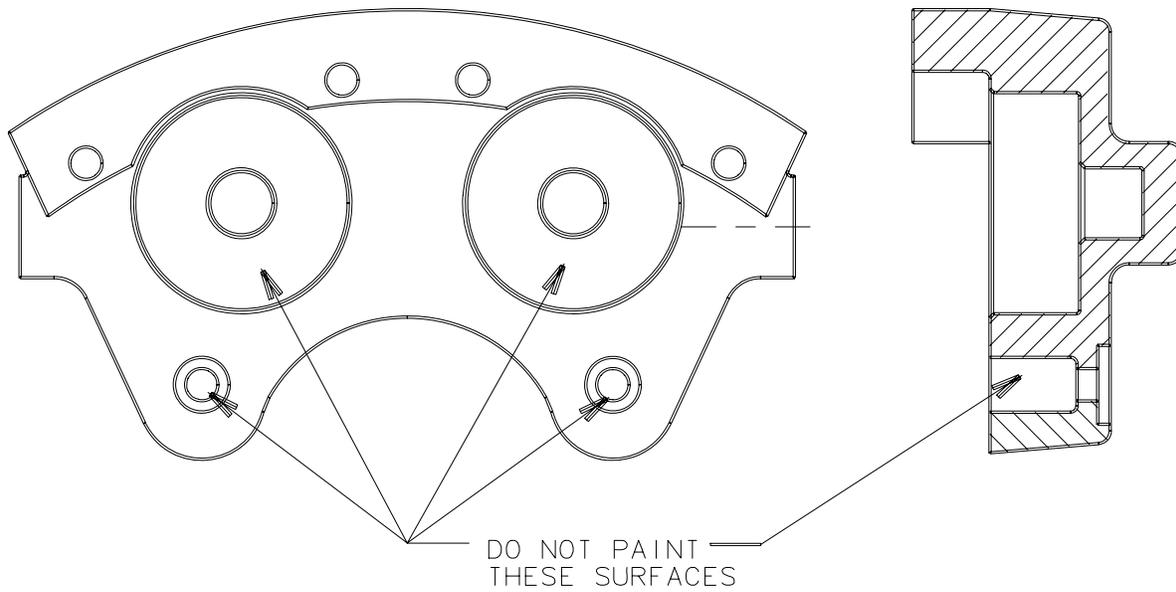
Typical Brake Cylinder, Painted Surfaces
